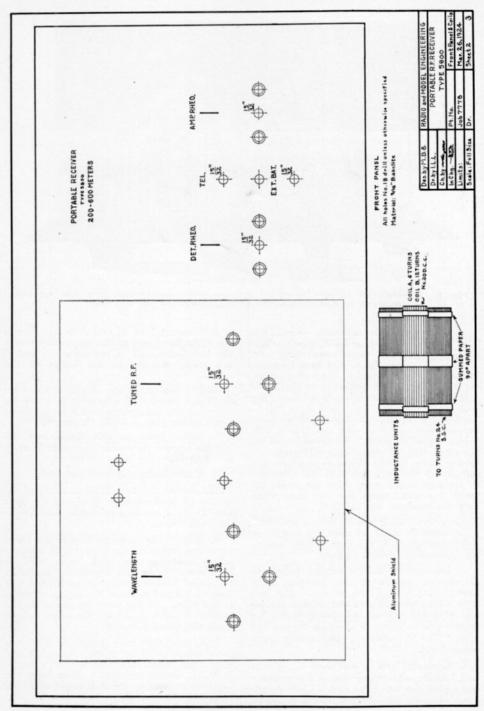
One-half size drawing of the front panel and the pickle bottle coils. Note that the outline of the aluminum shield is also given.
